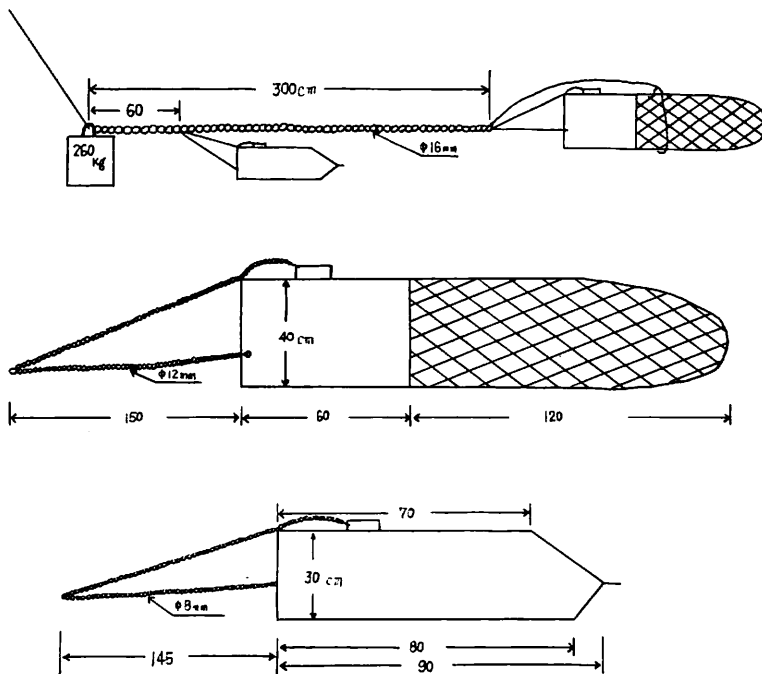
Dimensions of cylinder-type dredge and chain-bag dredge used in GH 74-3 cruise and connection of both the dredges (drawn by Yasumasa KINOSHITA).
